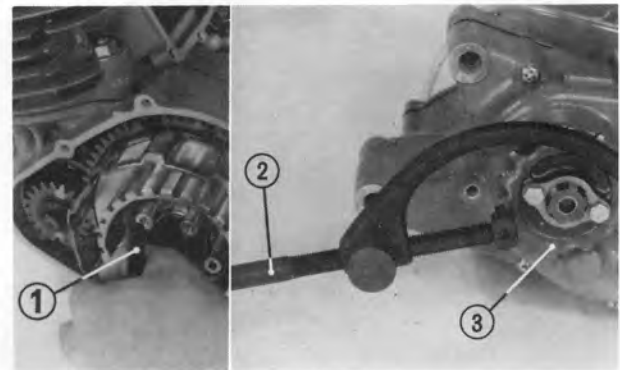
(1) Lock nut wrench (2) Universal holder
